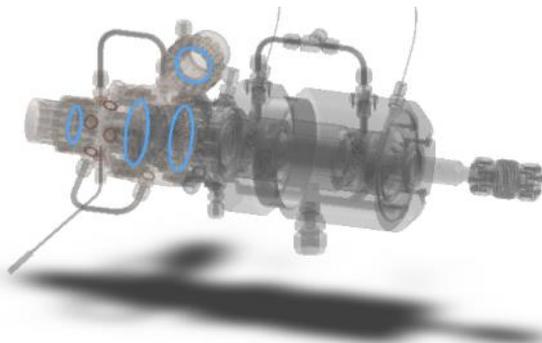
Cryogenic static seals of the pump assembly and flanges.
